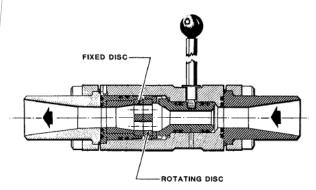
Rotating disc choke. (Courtesy of Willis Control Division, Cameron Iron Works: Houston.)
